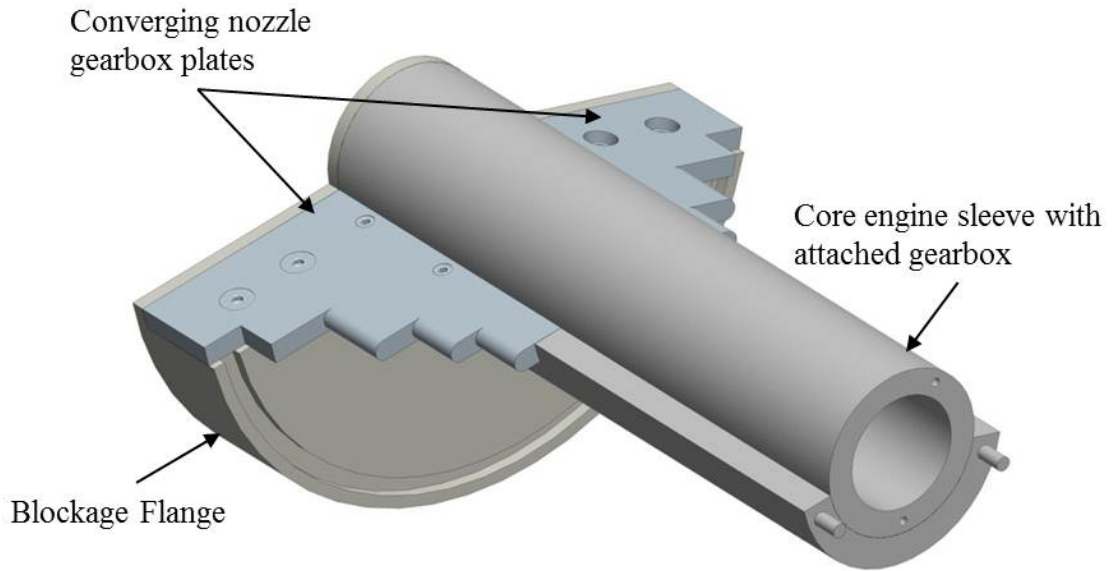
The gearbox blockage assembly located within the converging nozzle.
